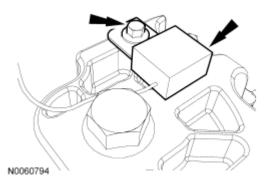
Locating Radio Frequency Interference Capacitor Bolt Courtesy of FORD MOTOR CO.
